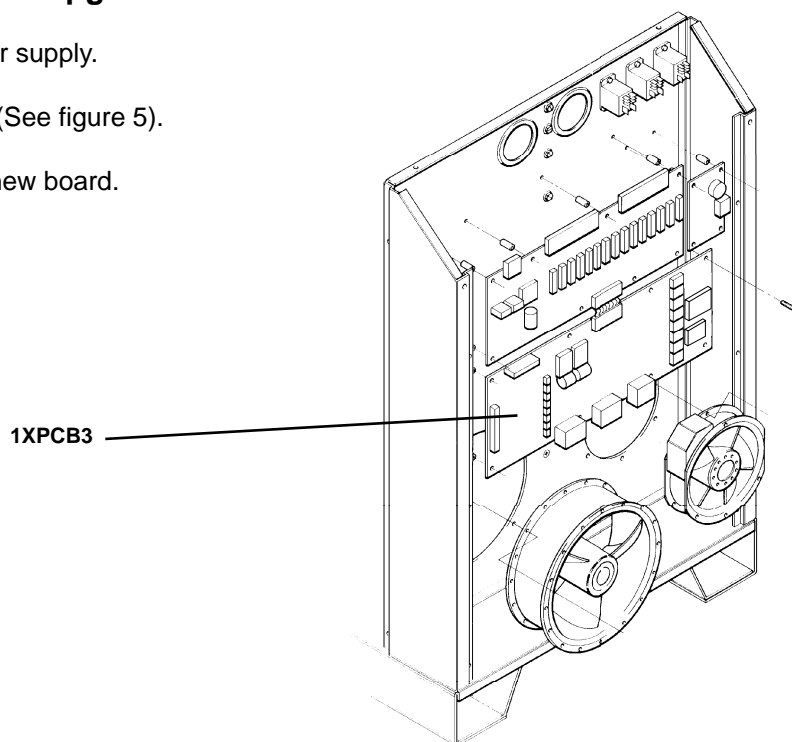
Power Supply Control Board 1XPCB3 and Firmware IC (U9) Locations
